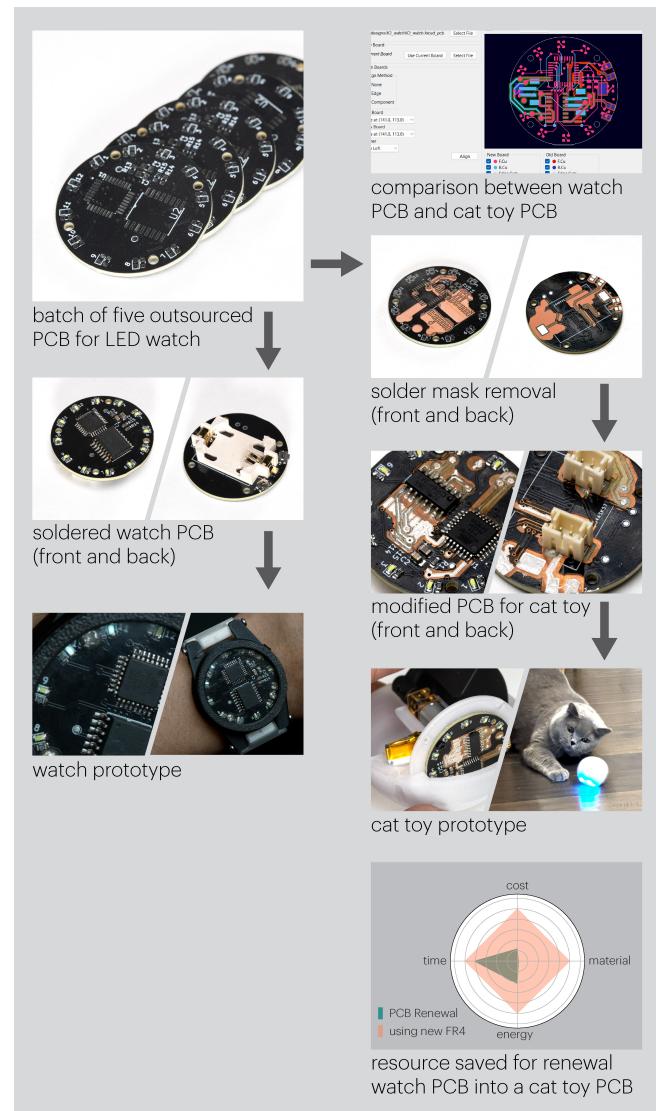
Renewal of an outsourced double-layer PCB: the left column shows the production of LED watch PCBs, including assembly into a working watch. The right column illustrates the renewal process, showcasing PCB design comparisons, solder mask removal, and board modifications for a cat toy, and its final assembly. A radar chart highlights the resources saved through PCB RENEWAL versus creating a new FR4 board.
